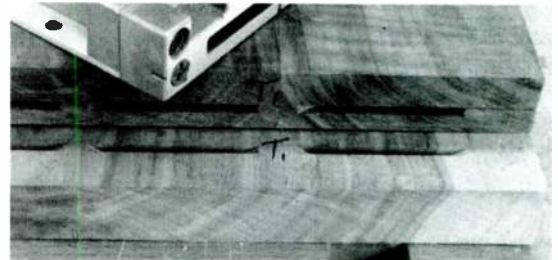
Biscuit joints for top and side pieces. Note the marking identification on the joint surfaces.
